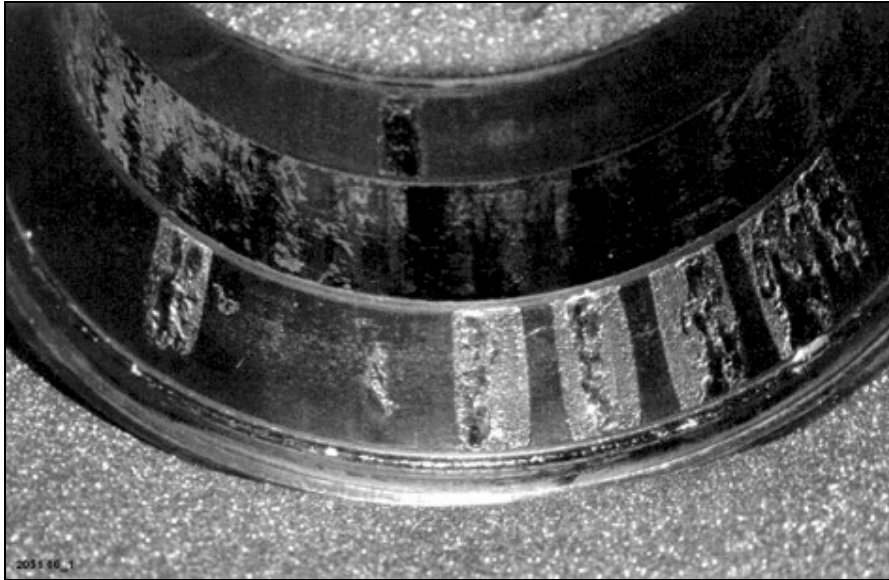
Large Cup Defect in Bearing on Axle 4 of Run 24
